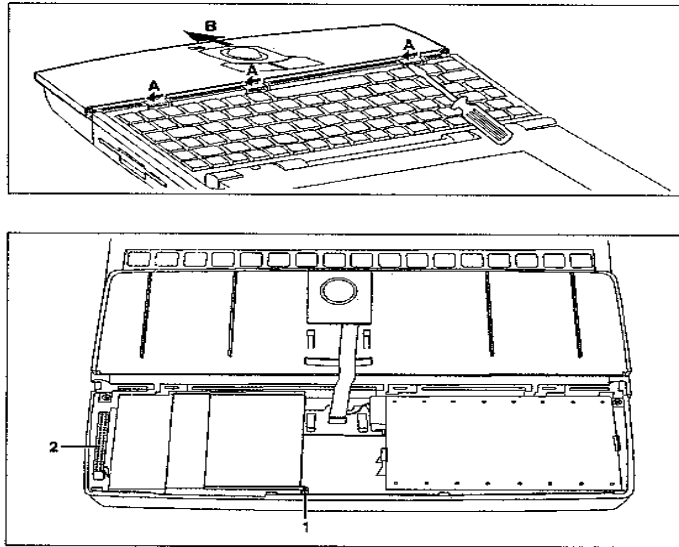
Hard Disk Drive Disassembly/Reassembly
